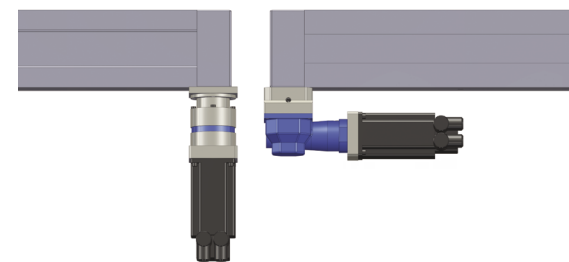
Using an inline gearbox (left) instead of a right angle gearbox (right), or vice versa, can reduce machine footprint.
